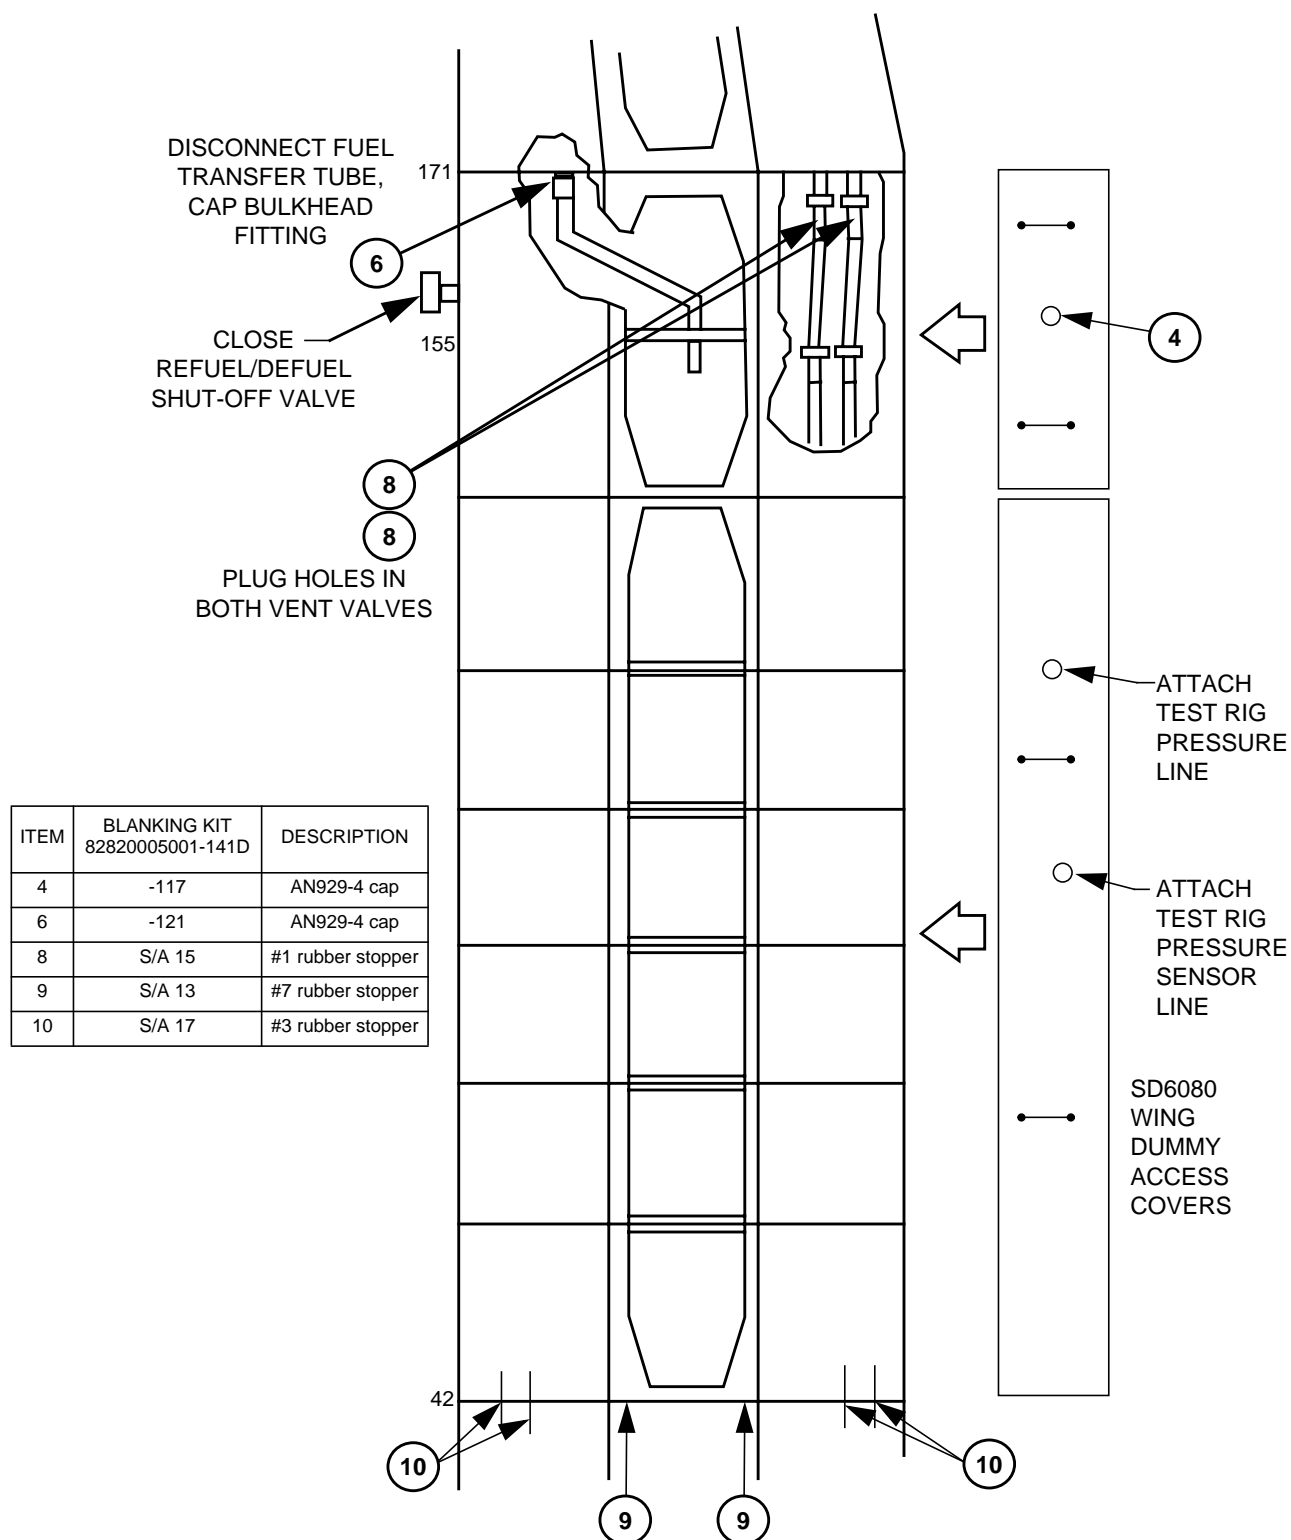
First Pressure Test of Auxiliary Fuel Tank
